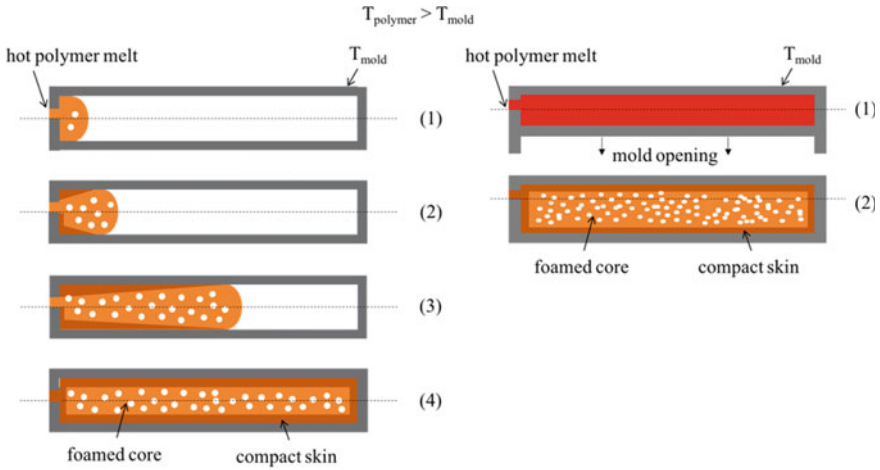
Mold filling and formation of the classical FIM foam morphology. Left: low pressure foam injection molding; right: high-pressure foam injection molding. *Copyright (2018) Neue Materialien Bayreuth GmbH
